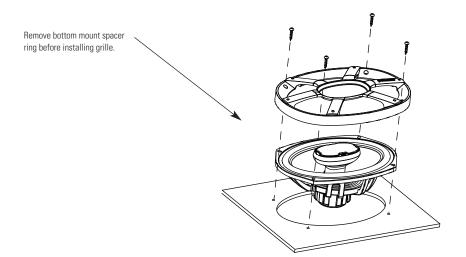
INSTALLING MM651& MM6501 WITH GASKET
